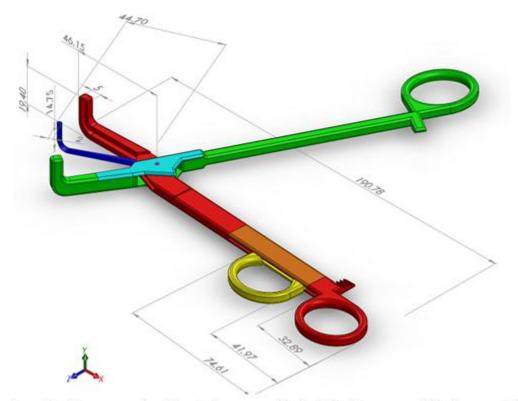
The seven parts of the device as assembled with the tips open and blade exposed (blue). Note: the spring and the wire are hidden. All dimensions are in mm.
